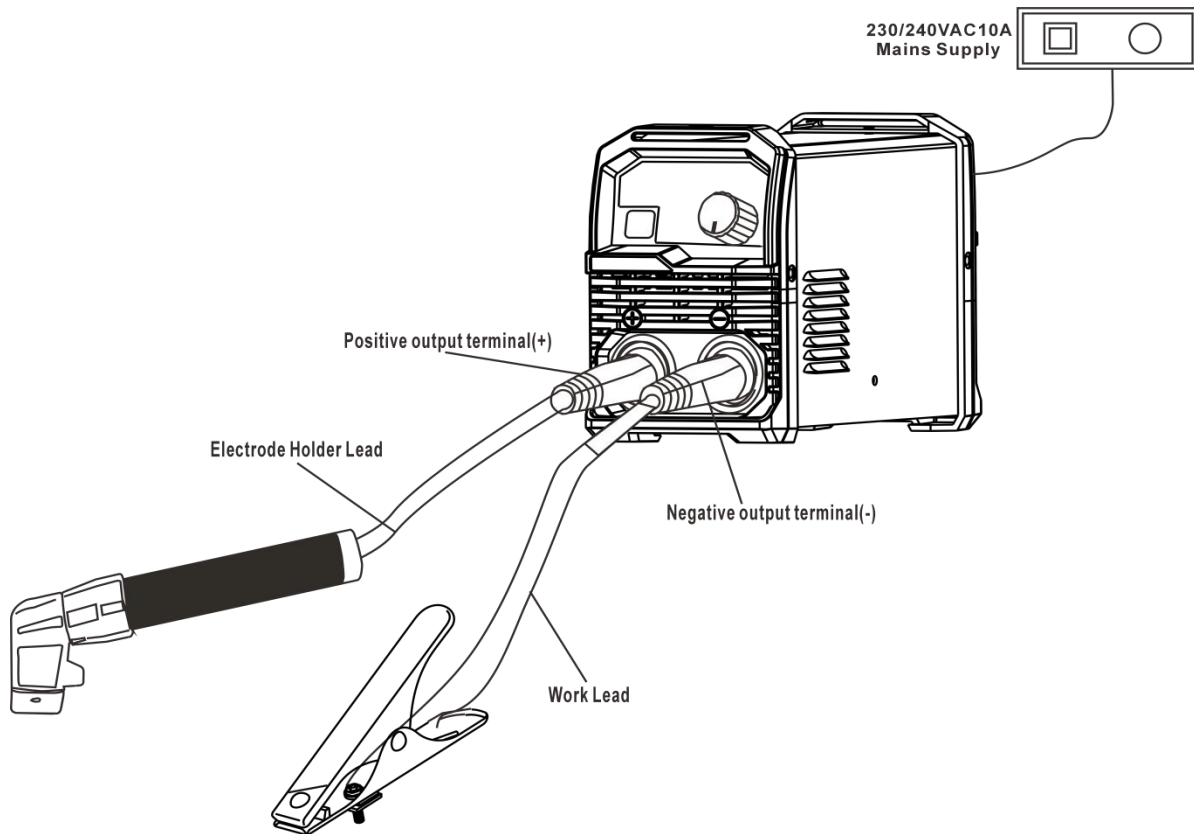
Setup for ARC(MMA) Welding
